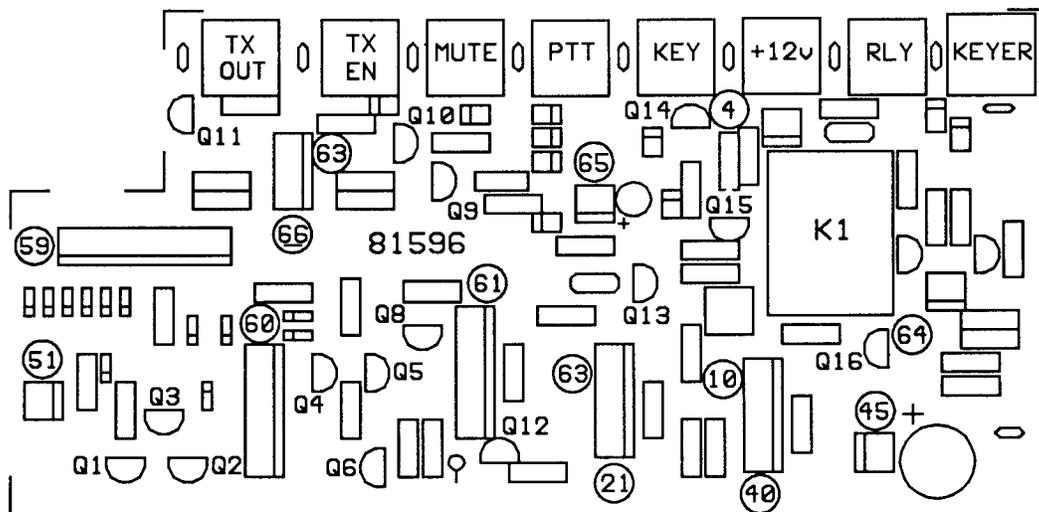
CONTROL BOARD COMPONENT LAYOUT (81596)
